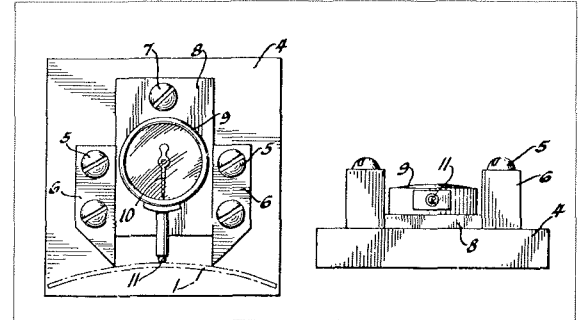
Almen Gage from U.S. Patent. Elevation (left) and Side View.
